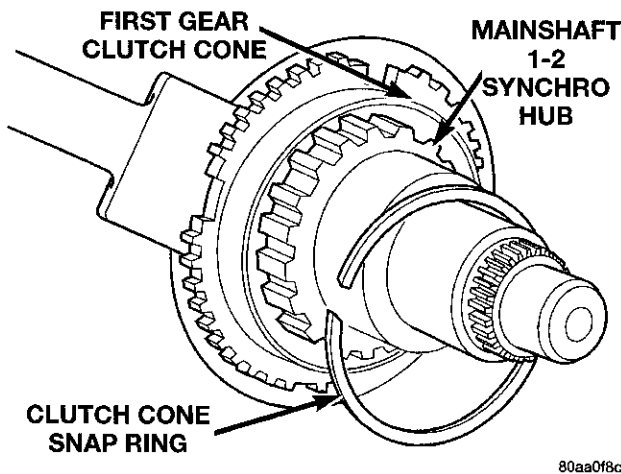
Installing First Gear Clutch Cone Snap Ring
